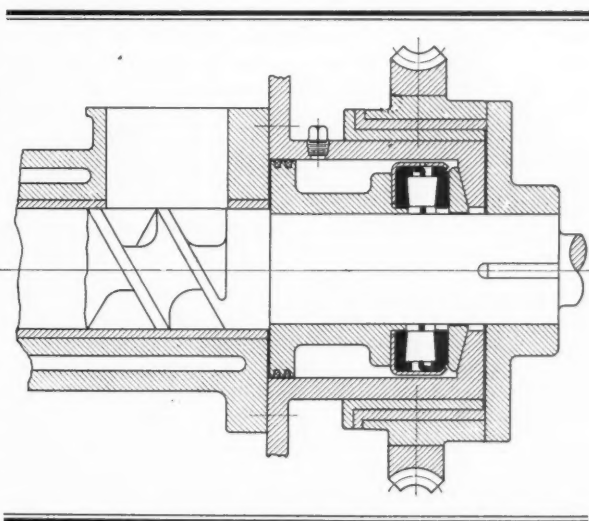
Bearing Mounting for Tube Machines of Small Capacity.
